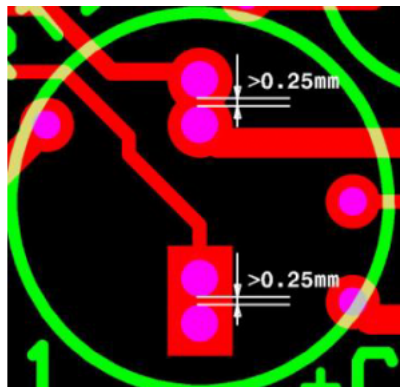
Illustration of Overlapping Drilled Holes (from Eurocircuits PCB design guidelines) [5]
